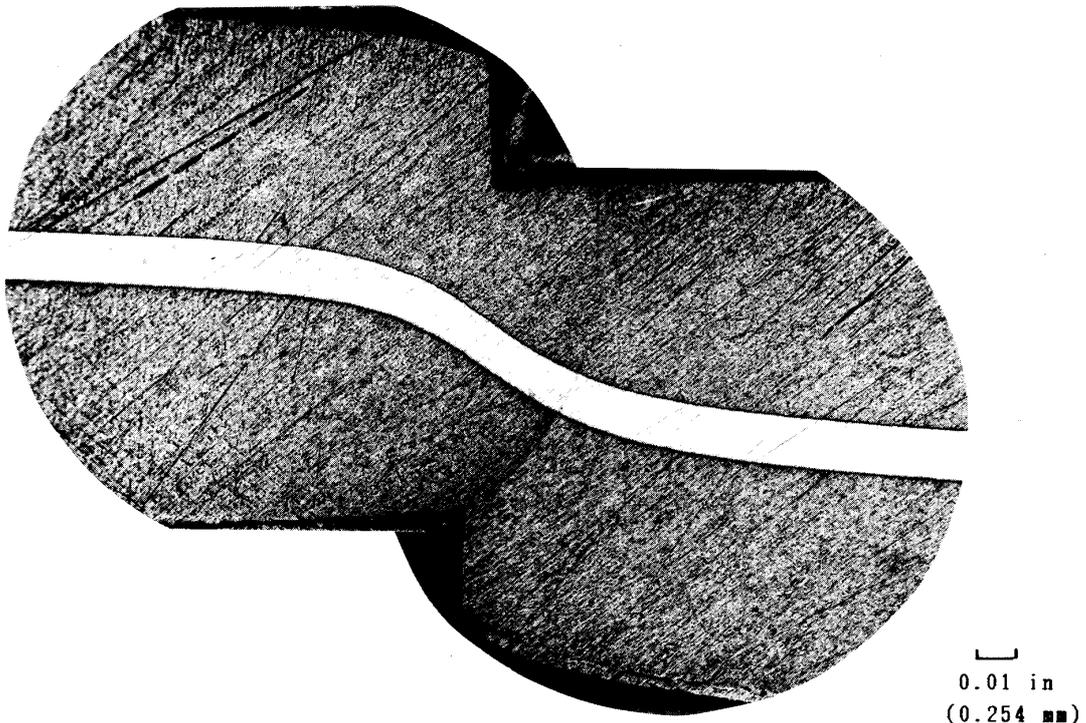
Al-clad SS Half-Way Specimen Section
